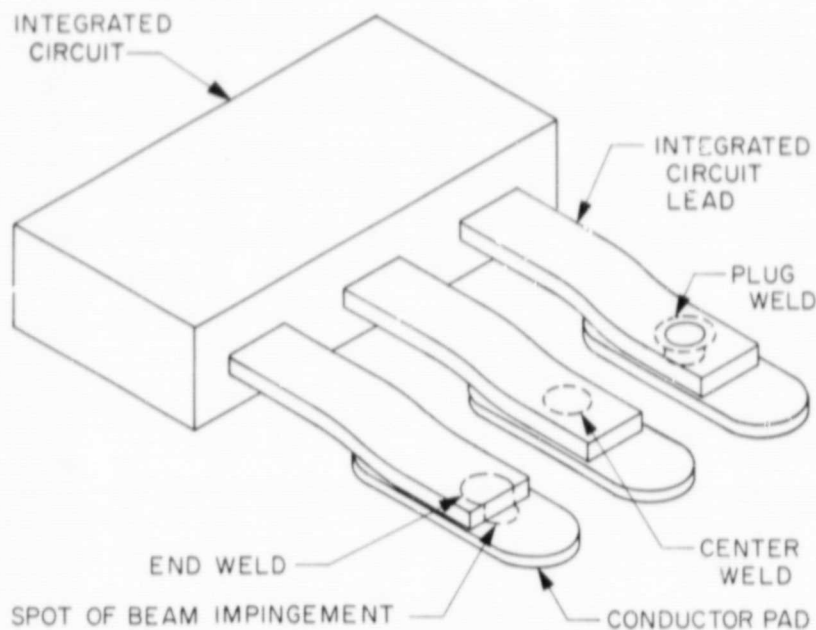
Joint designs for integrated circuit welding (from Ref. 27)
